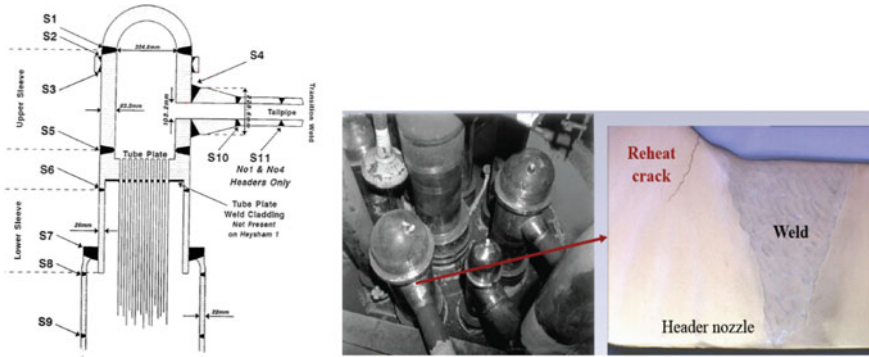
Superheater header: type 316H austenitic stainless steel thick section weldments [5]
